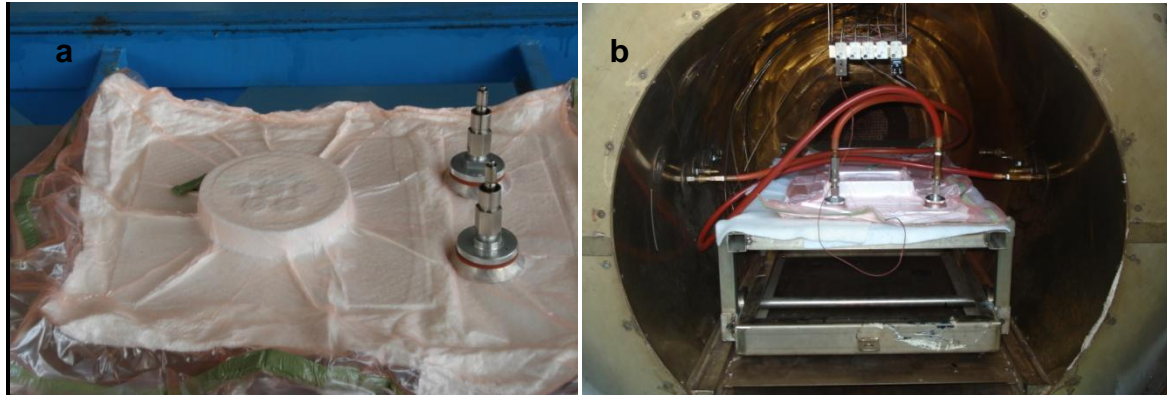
(a) Chiral cell assembly inside the vacuum bag (b) Vacuum bag inside the autoclave
